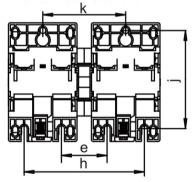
TGC1s-40N~95N outline and installation dimensions drawings
